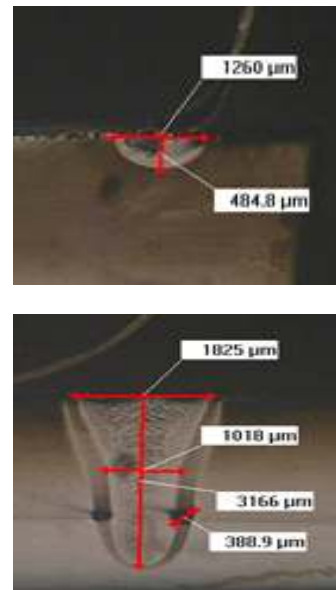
Measured bead geometry (on the left: low power & low welding speed weld; on the right: high power and high welding speed weld)
